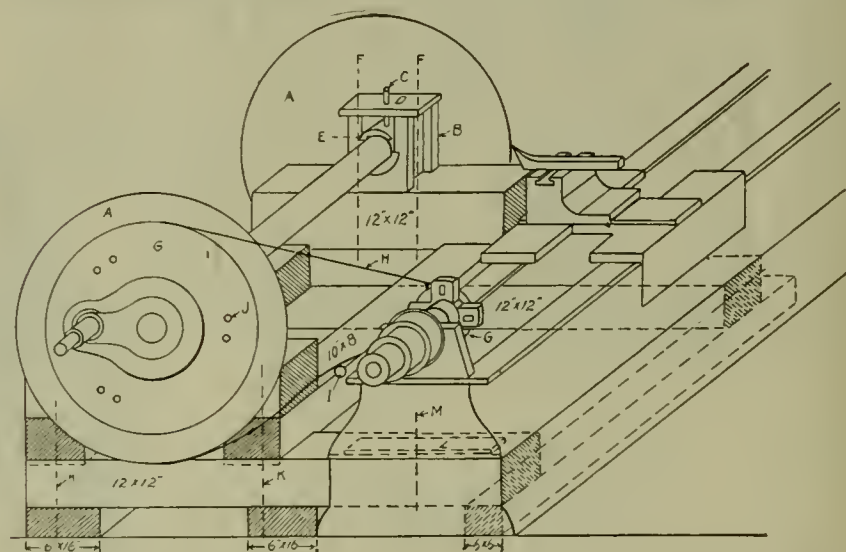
METHOD OF TURNING DRIVING WHEEL TIRES WITH A 26-IN. LATHE, AT THE NEW ROUND HOUSE OF THE RIO GRANDE & EAGLE RAILWAY.
